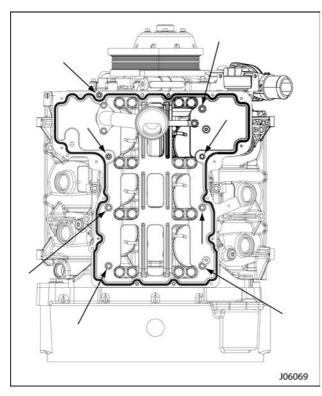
Upper oil pan mounting bolts (stripped chassis)
